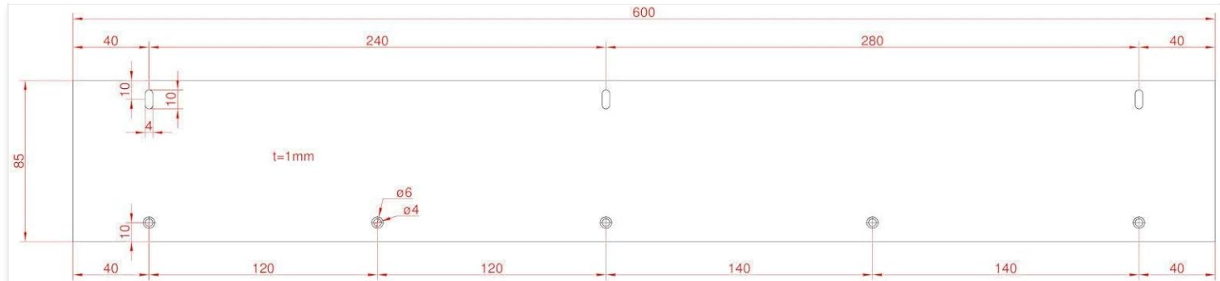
Technical drawing with dimensions. A detailed technical drawing illustrating the dimensions of the SOTECH steam protection plate. Key measurements include a length of 600mm, width of 85mm, and material thickness of 1 mm, along with screw hole placements.
